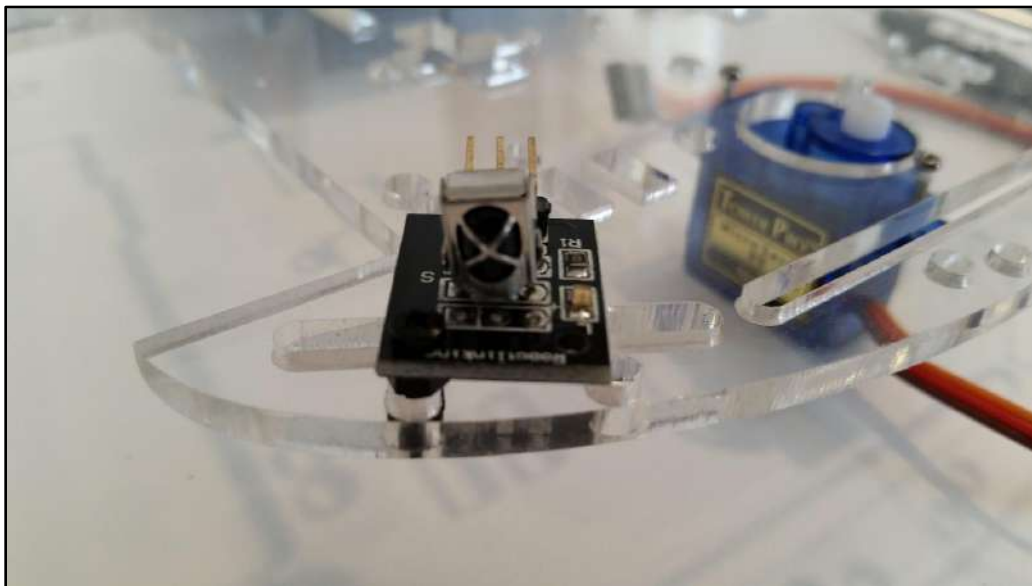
Infrared Sensor Mounted to Chassis Top Plate
